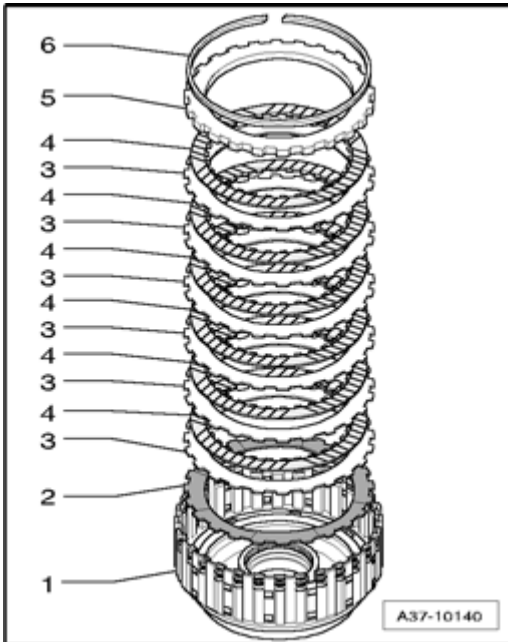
Cylinder "B", Wave Washer, Outer Plate, Coated Plate And Thick Outer Plate
